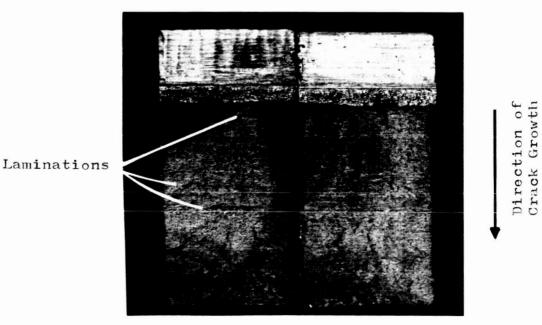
Fracture Surfaces of Bend Specimens showing Delaminations for Cracks Propagating Perpendicular to the Rolling Plane of the Plate
